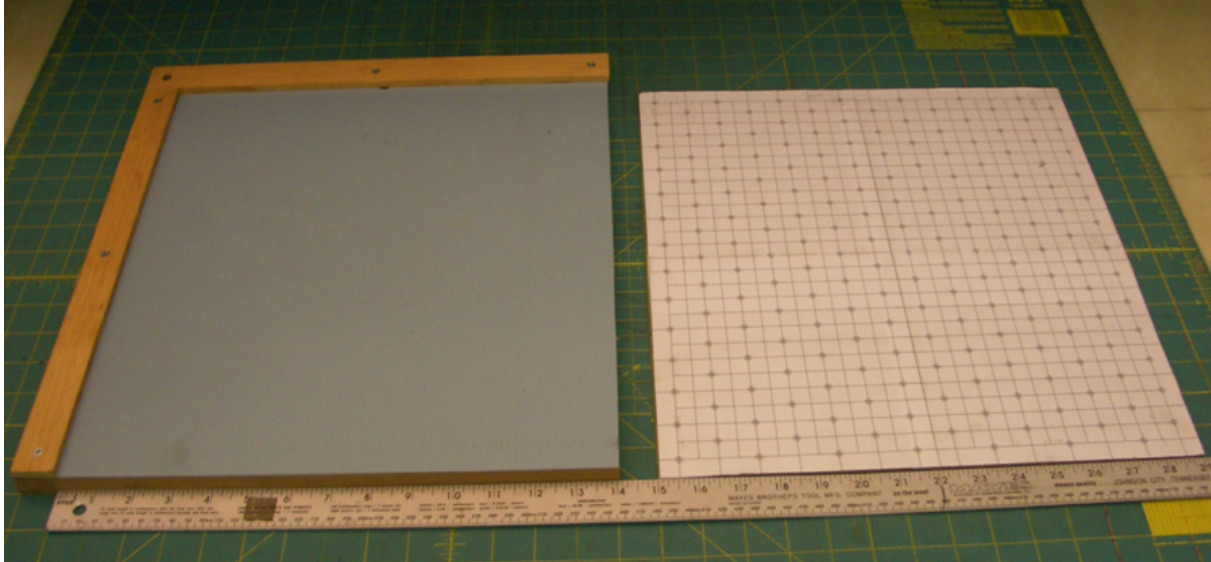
Photograph of the pathway machining fixture. The bottom plate was located on the left and the paper template on the right.
